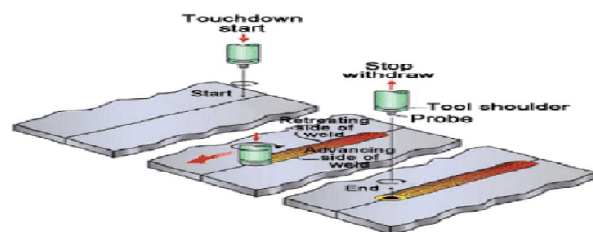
Friction stir welding process adapted from (Khan, Khan, & Siddiquee, 2015).
